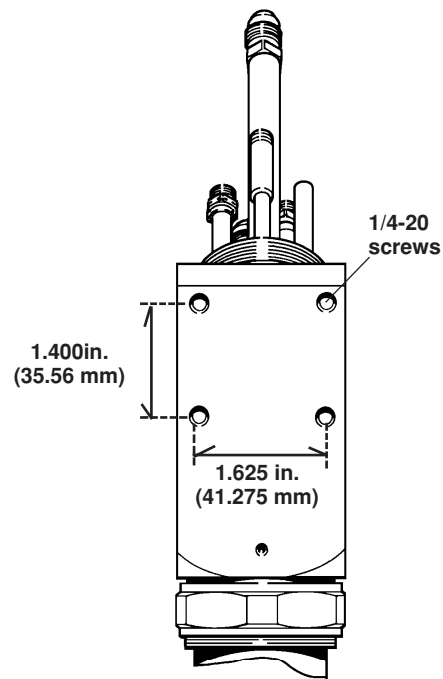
45° Torch Quick Disconnect Mounting Hole Dimensions
